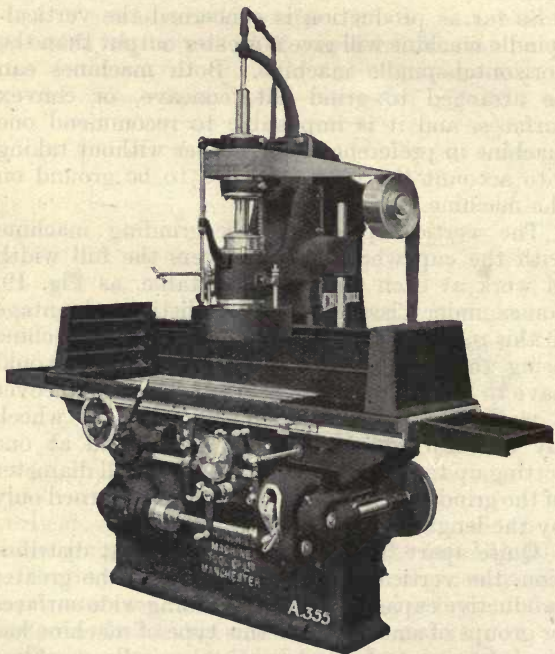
VERTICAL-SPINDLE SURFACE GRINDER
